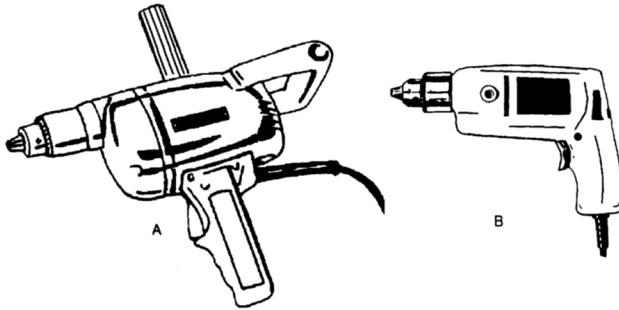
Heavy-duty 6mm portable drill (view A) and light-duty 6mm portable drill (view B)
